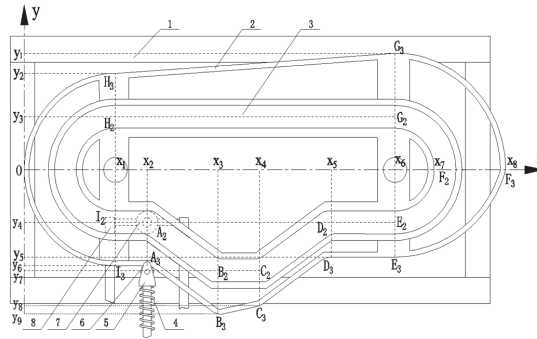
Structure diagram of putter cam and hole-forming cam: 1—frame; 2—putter cam; 3—hole-forming cam; 4—putter spring; 5—putter of open and close; 6—guide roller; 7—putter bearing; 8—putter of hole forming. Note: $A_3, B_3, C_3, D_3, E_3, F_3, G_3, H_3, O$ and I_3 represent the limit points of outer contour of follower cam. $(x_2, y_6), (x_3, y_9), (x_4, y_8), (x_5, y_5), (x_6, y_5), (x_7, 0), (x_6, y_1), (x_1, y_2), (0, 0)$ and (x_1, y_6) represent the coordinate values of points $A_3, B_3, C_3, D_3, E_3, F_3, G_3, H_3, O$ and I_3 . $A_2, B_2, C_2, D_2, E_2, F_2, G_2, H_2$ and I_2 are the special points of the movement trajectory of the center of the putter bearing in the putter of hole forming. $(x_2, y_4), (x_3, y_6), (x_4, y_5), (x_5, y_3), (x_6, y_3), (x_7, 0), (x_6, y_3), (x_1, y_3)$ and (x_1, y_4) are the coordinate values of points $A_2, B_2, C_2, D_2, E_2, F_2, G_2, H_2$ and I_2 , respectively. In order to keep the slider horizontal in the hole-forming stage, according to the overall size of the slider, the line segments I_3A_3 and D_3E_3 were designed as the buffer segments of the guide slider.
